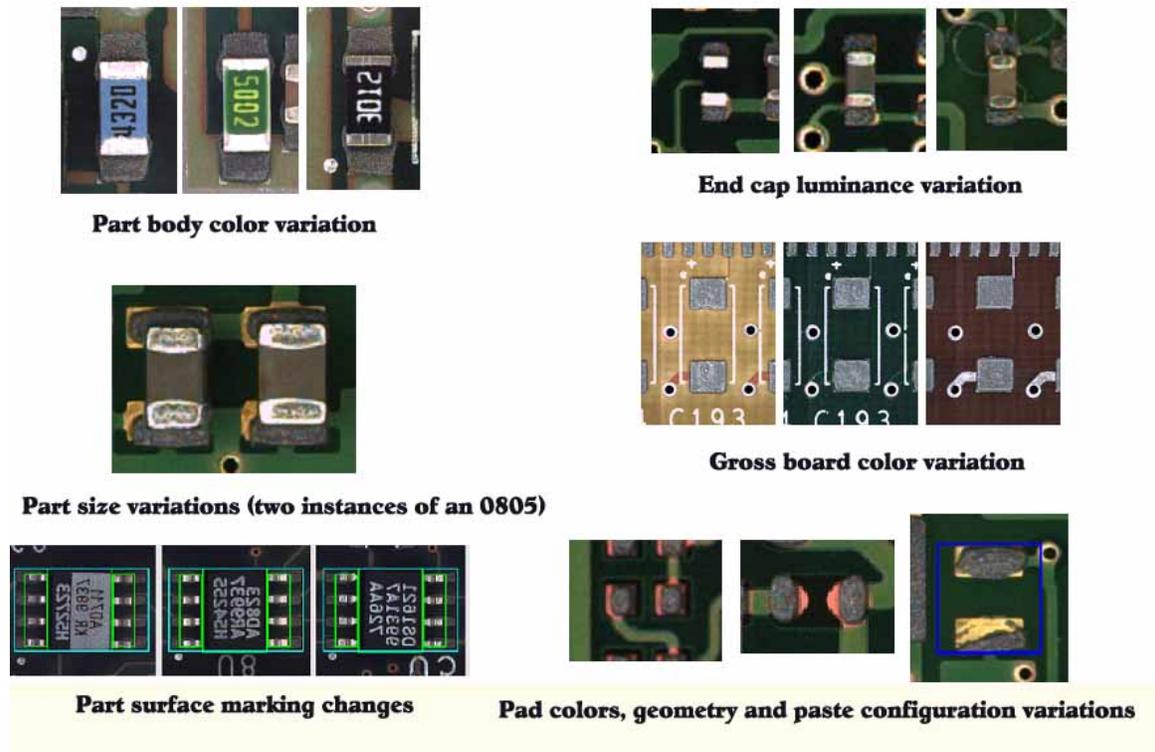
Printed circuit boards exhibit a large amount of acceptable variability in how the boards, paste, parts, and solder joints look. It is difficult for an optical inspection system to tell a good board from a bad board when all the elements of a board can change their appearances.
